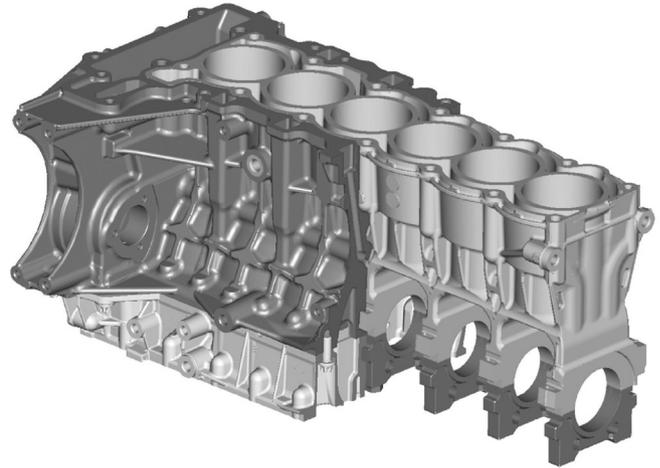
The BMW composite engine block showing a cutaway of the magnesium exterior revealing the aluminum interior [35].
